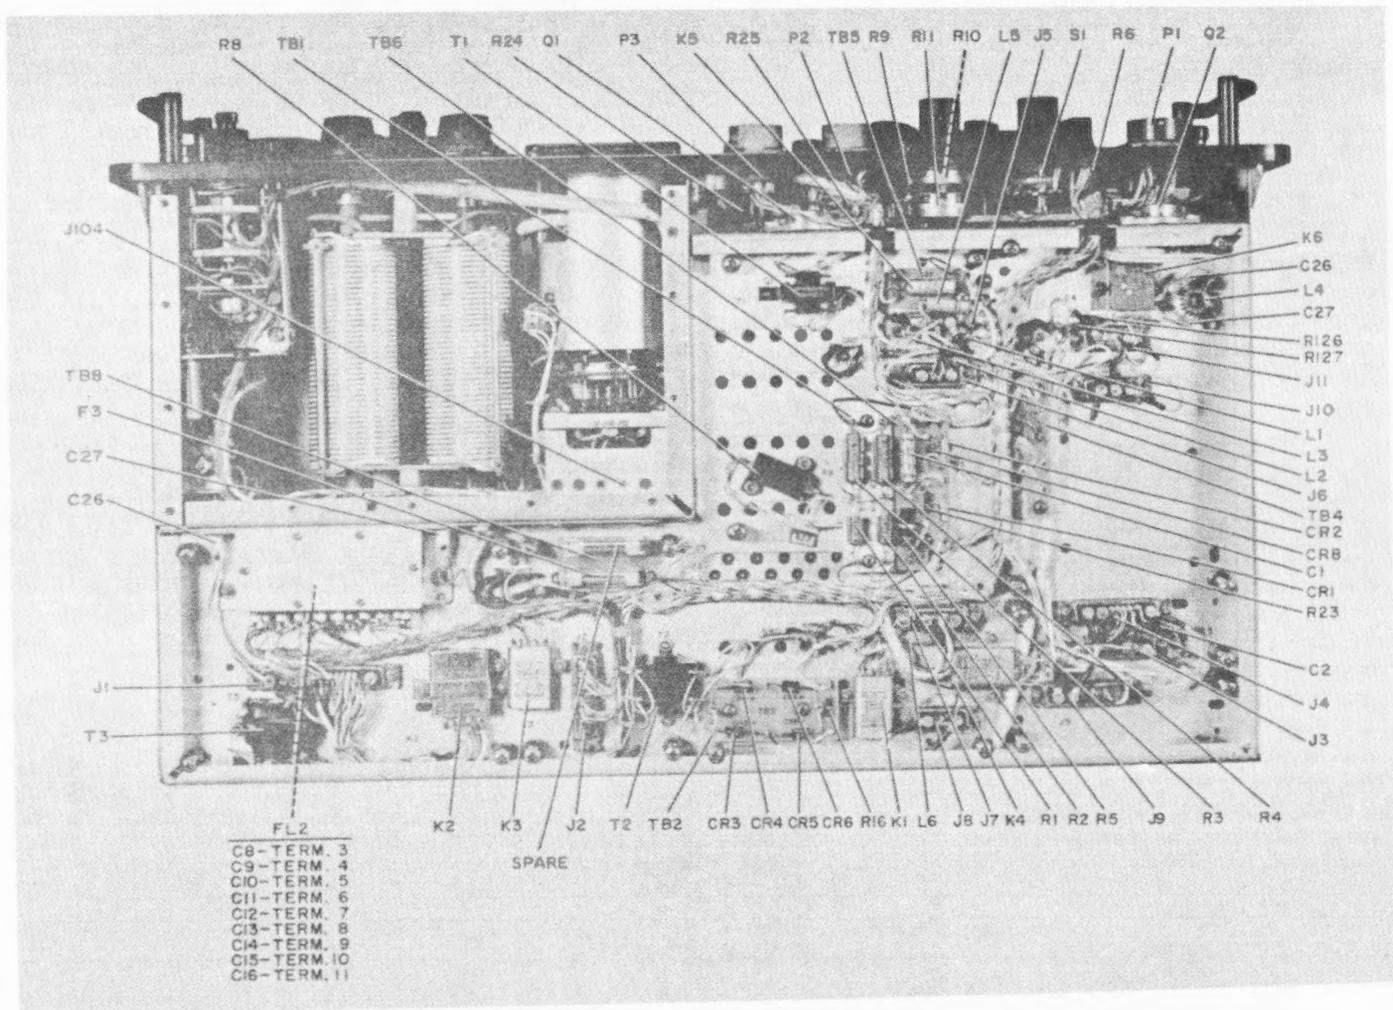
Electrical Equipment Chassis CH-474/PRC-47, Bottom View, Location of Components
